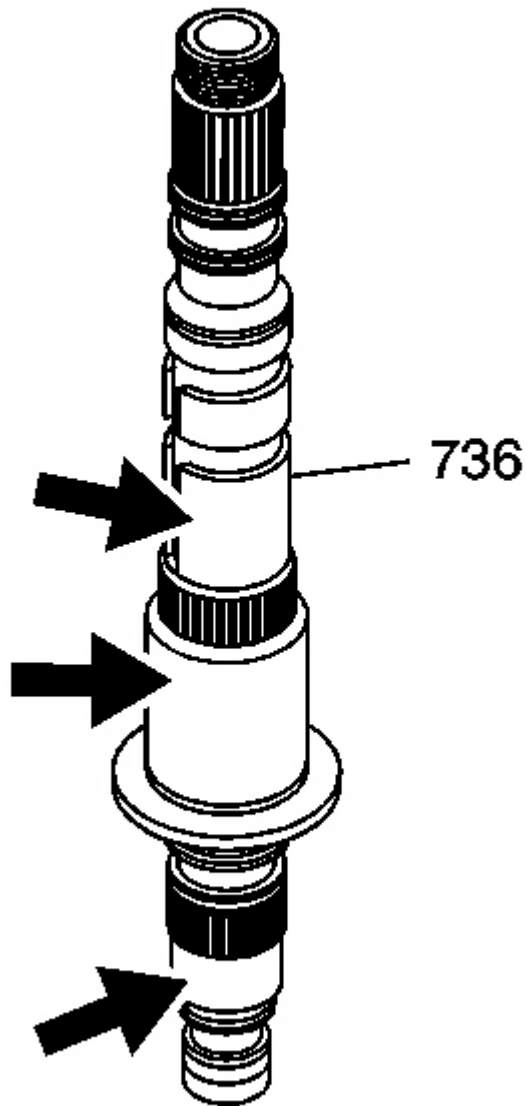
Inspecting The 1st/2nd Clutch Shaft For Damage
